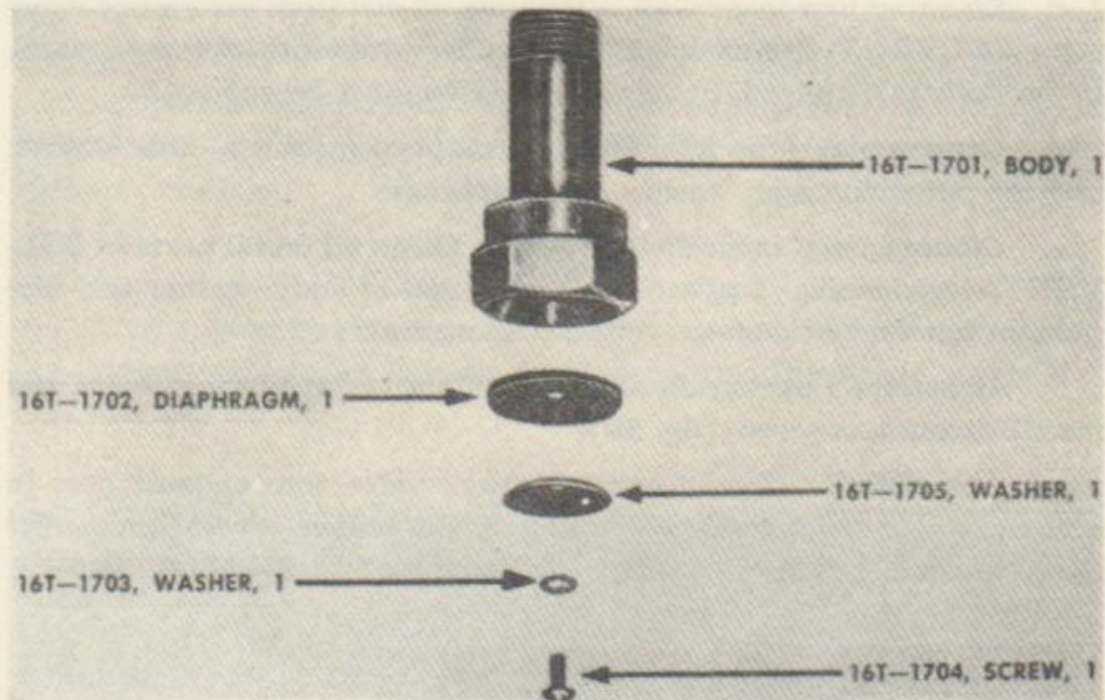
EXHAUST CHECK VALVE—EXPLODED VIEW
